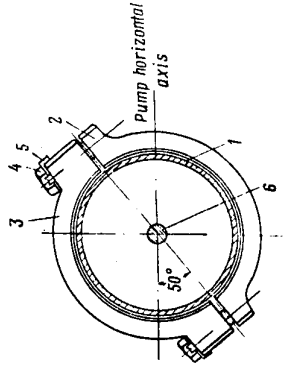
Arrangement of Half-Rings of HP-10A Pump-to-Accessory Drive Gear Box Quick-Release Joint
